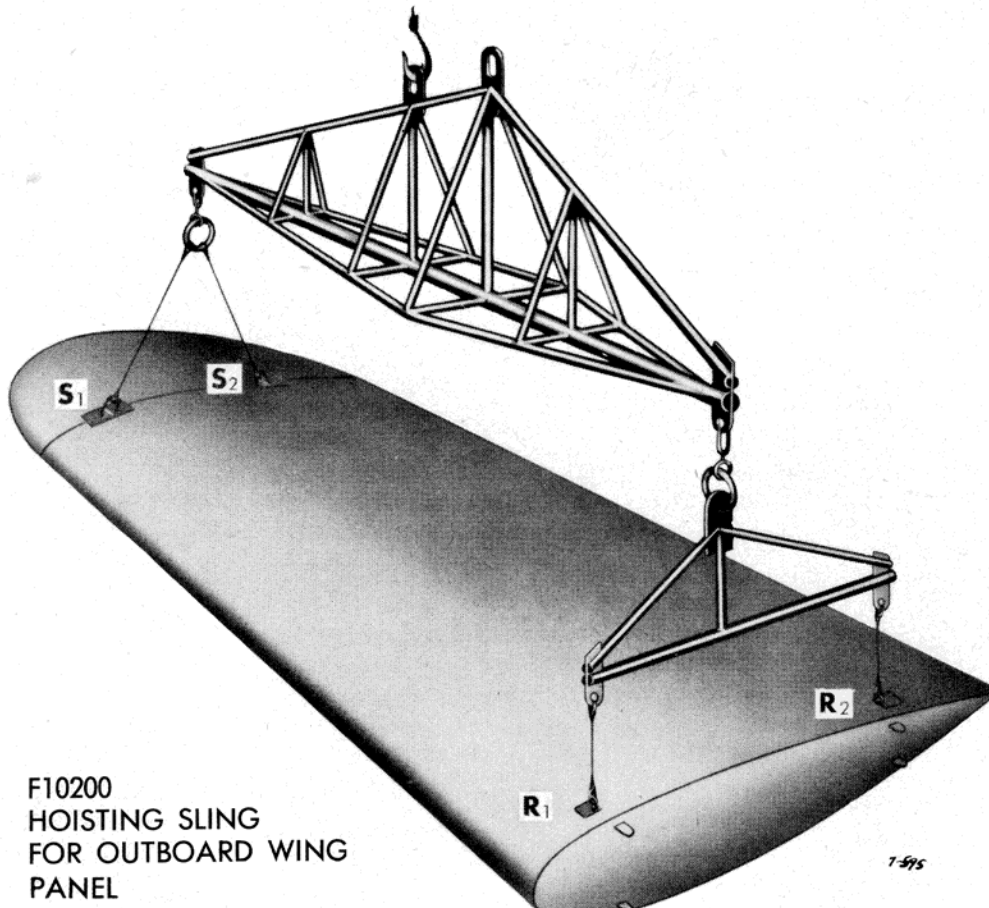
Ground Handling Equipment (Sheet 2 of 3)
